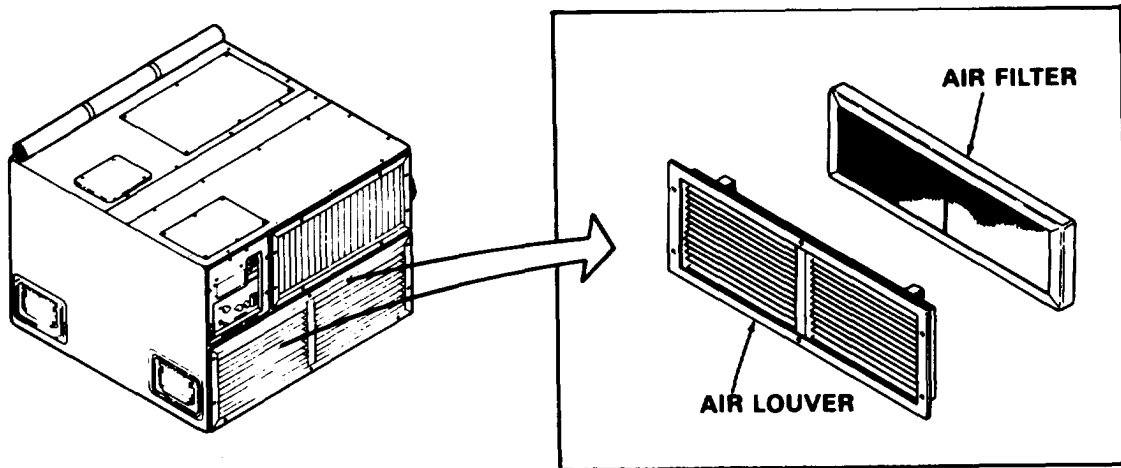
Evaporator inlet, outlet louvers, and filter removal and installation.
